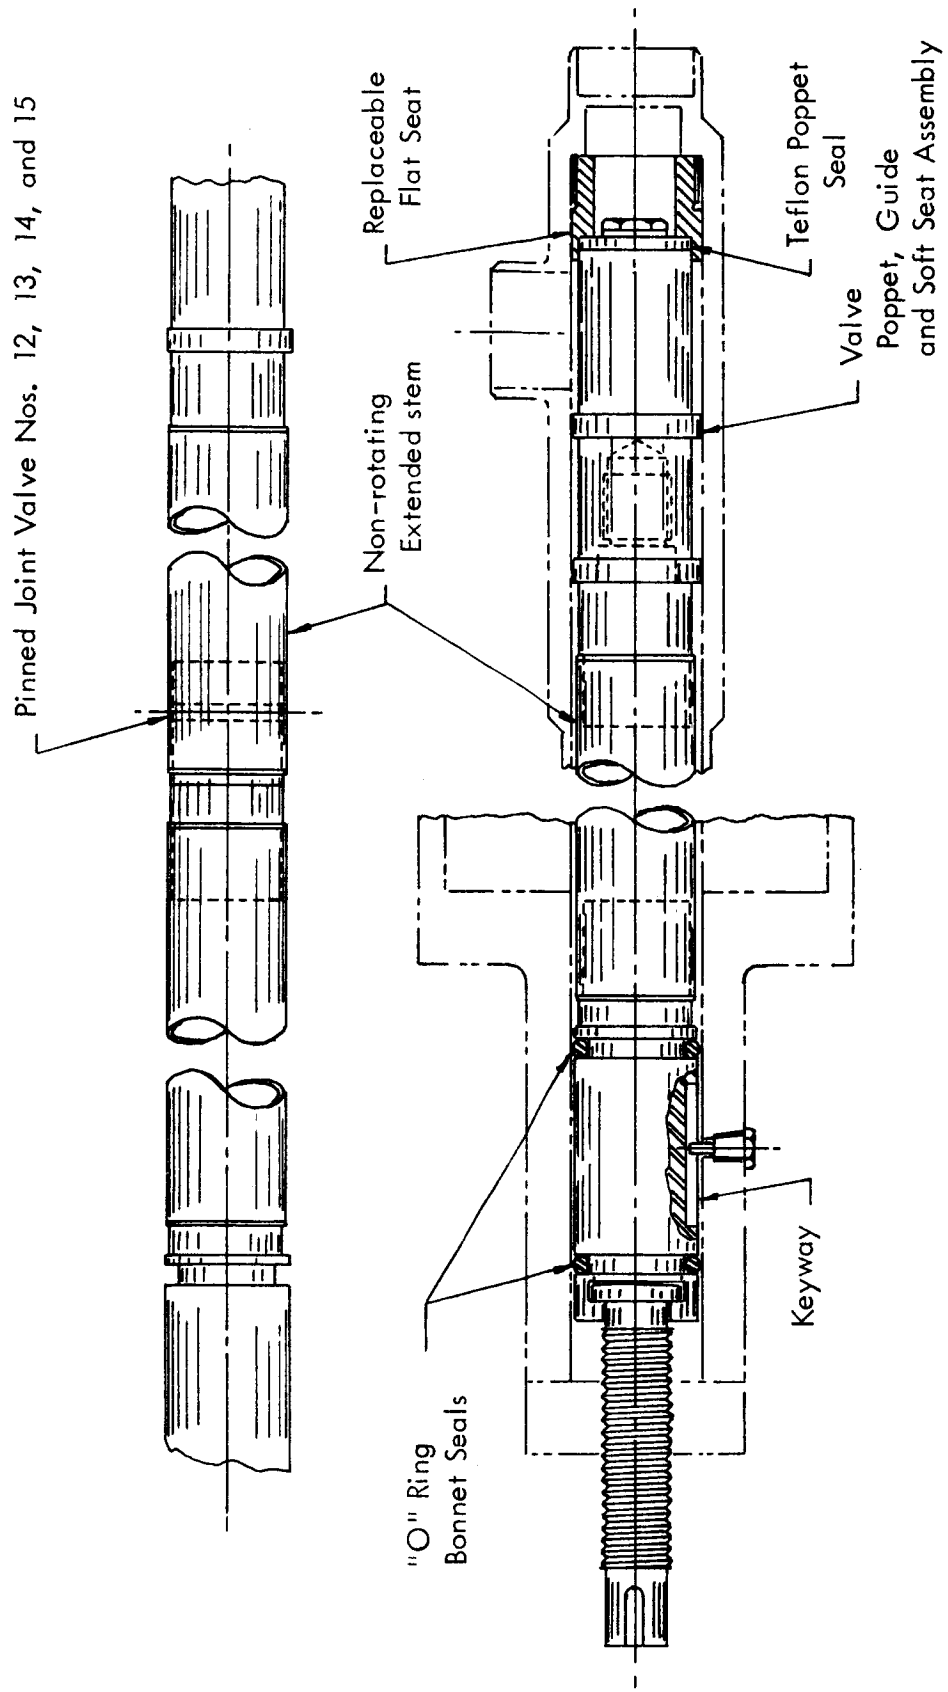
MODIFIED EXTENDED STEM VALVE INSTALLATION
